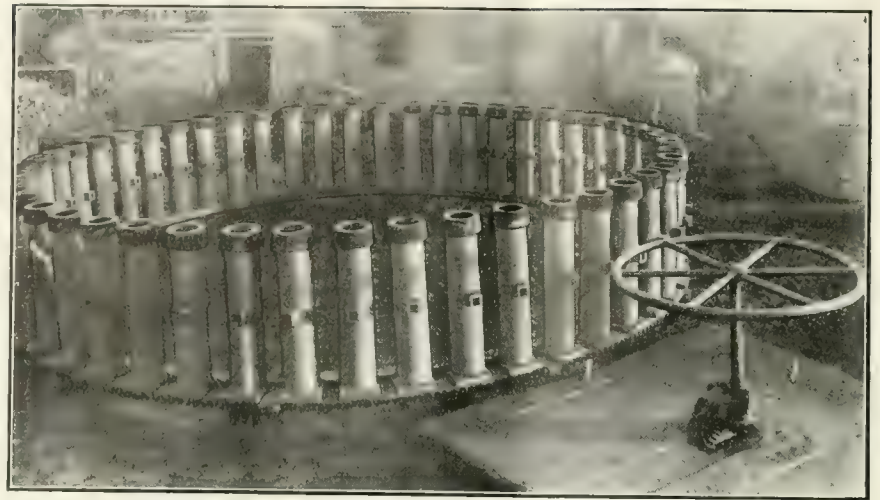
BATTERY OF INGOT MOLDS READY TO BE Poured.
